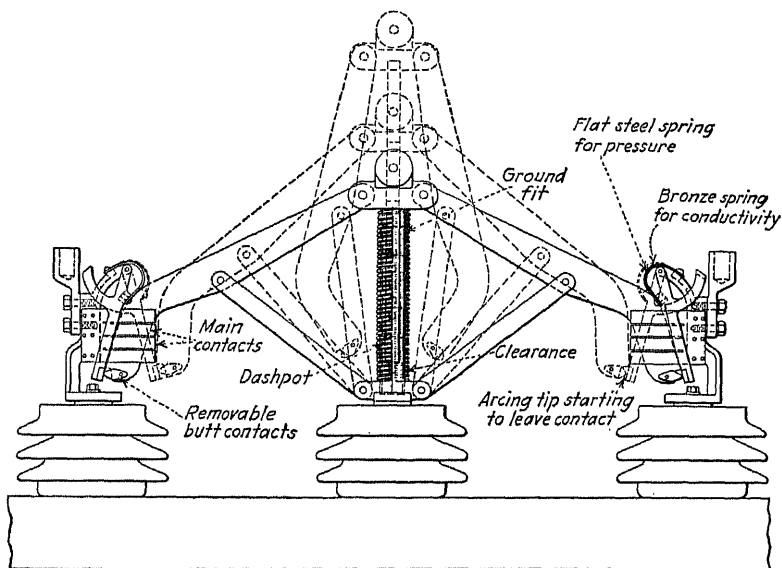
Kelman standard-type high-speed pantograph assembly.
